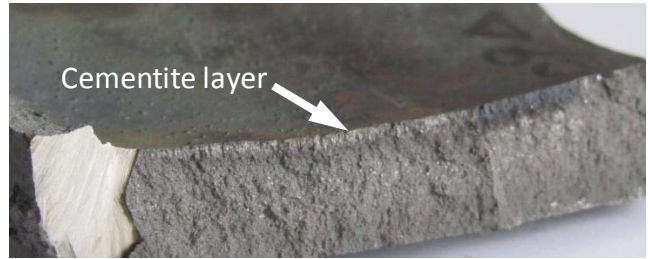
Fracture surface of an industrial thimble where a layer of white is seen in areas adjoining the thimble-stub interface.
